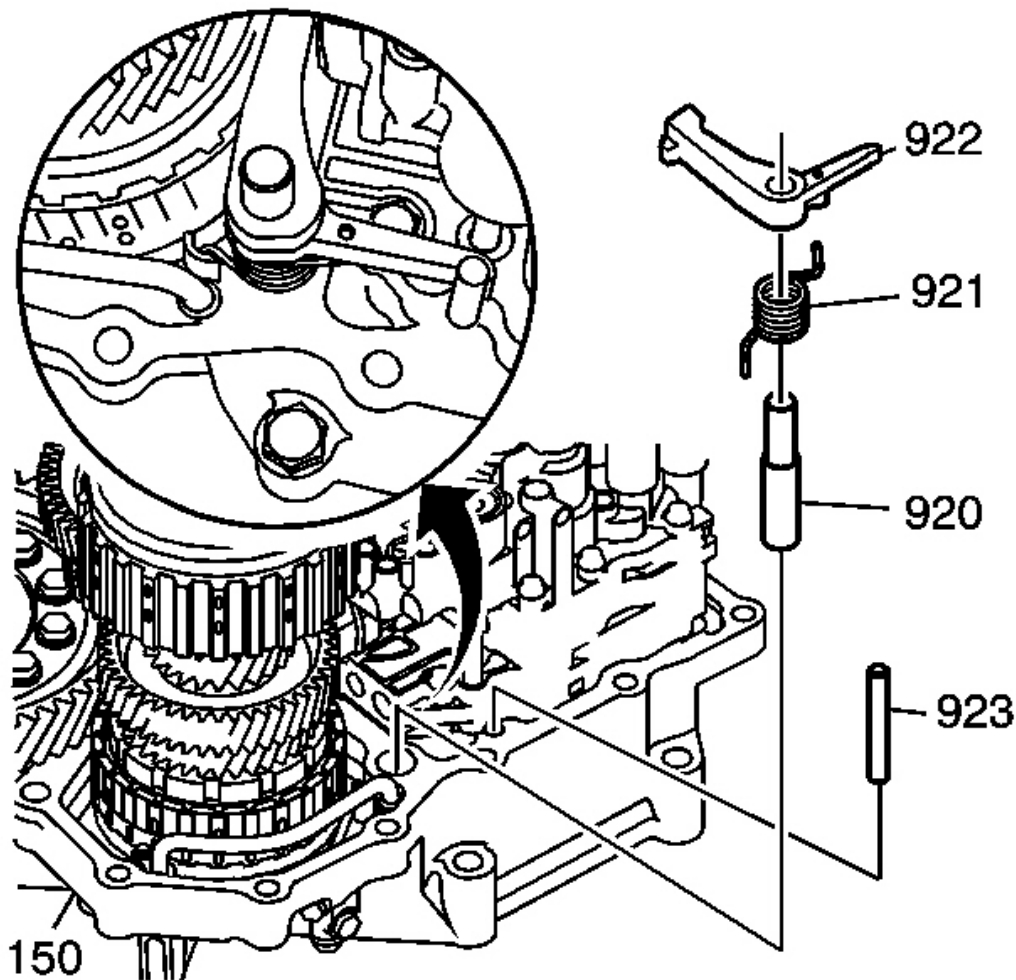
Park Pawl, Spring, Shaft & Torque Converter Housing
